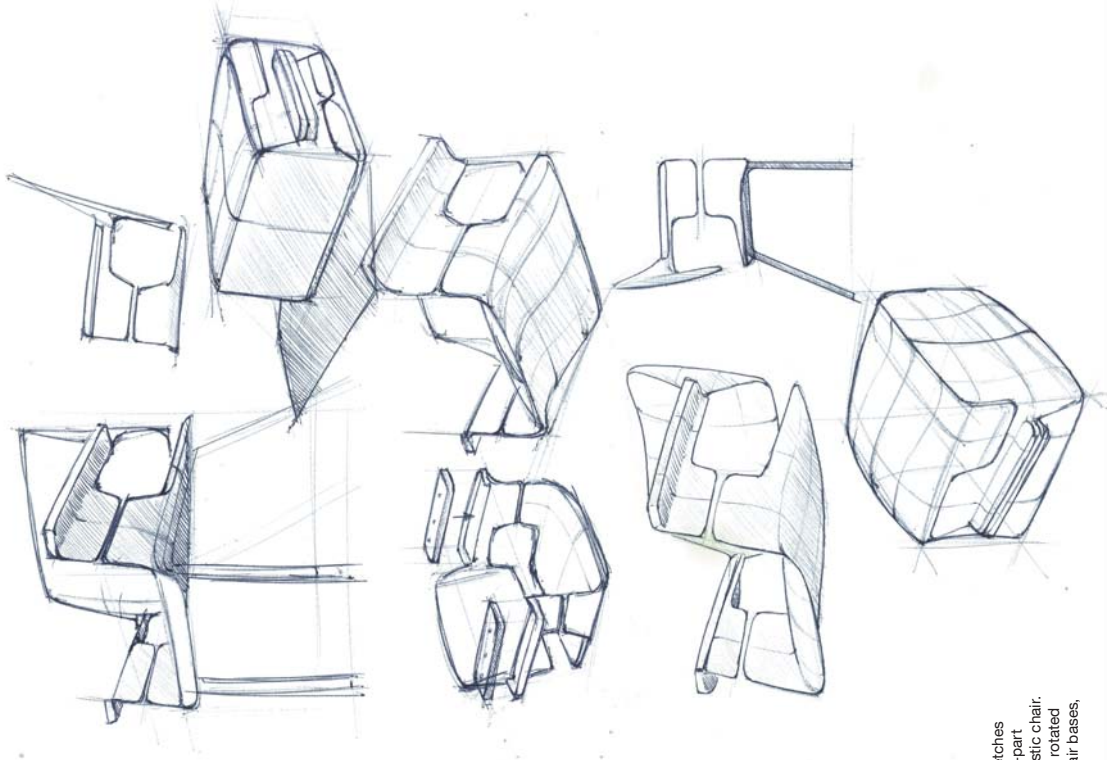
Concept sketches of the Roto Chair, a four-part rotatorially moulded plastic chair. The moulding is cut and rotated to craft two identical chair bases, arms and backs.
